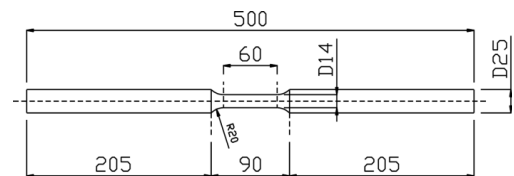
Geometry of base metal tensile test specimen (No.4 rod specimen)
